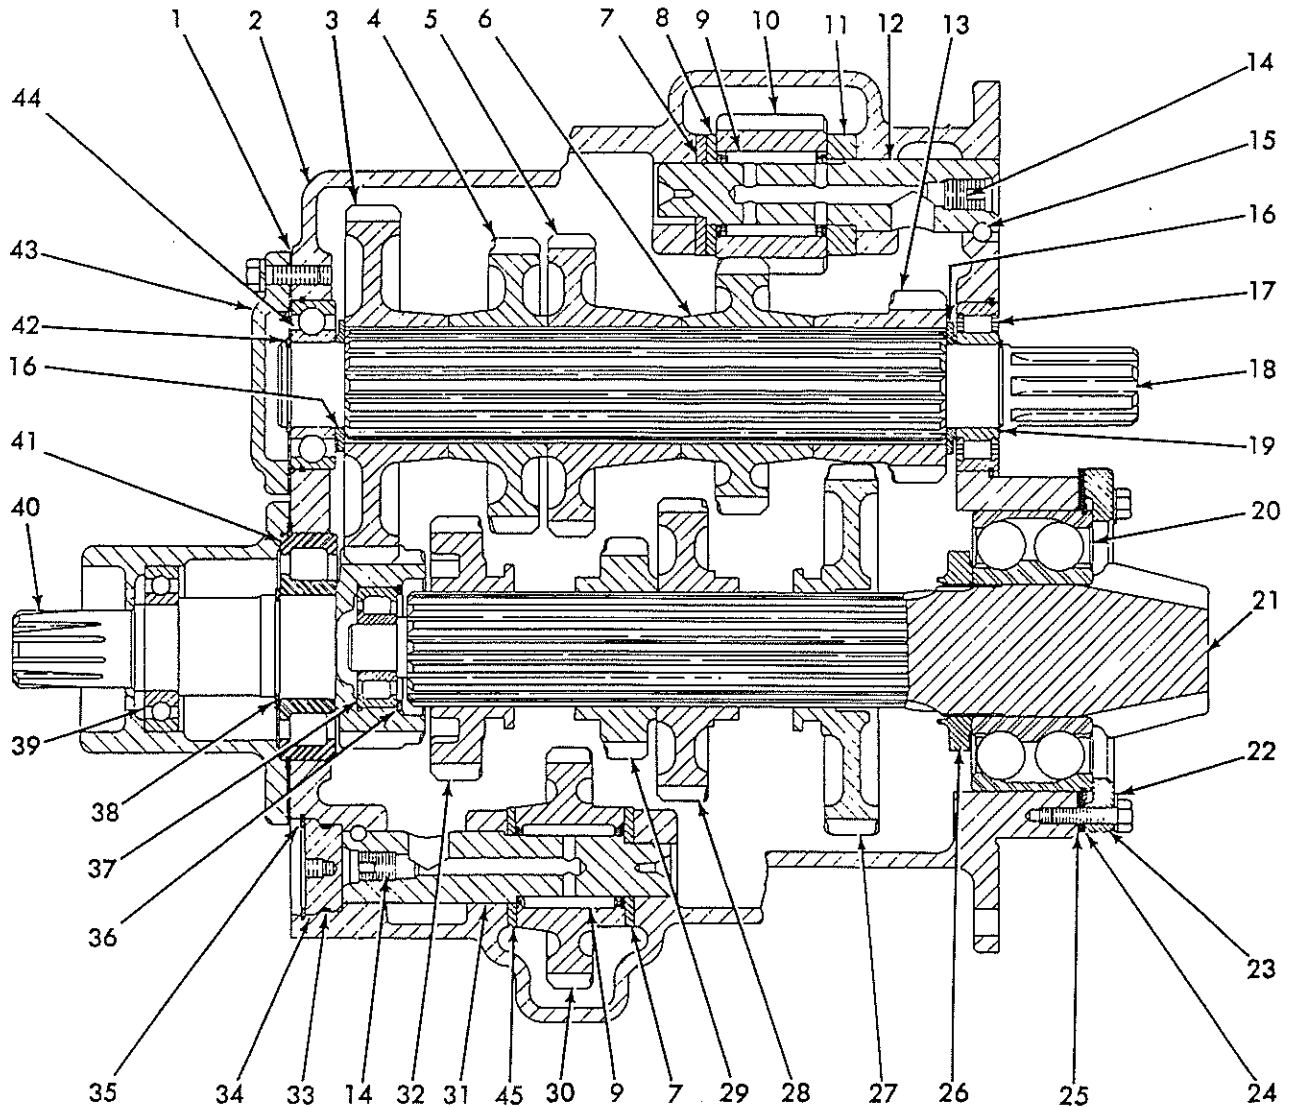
Two Speed Reverse Transmission (Optional Equipment)
